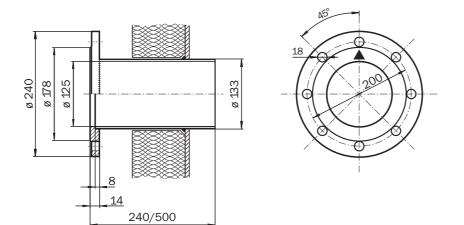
Purge air fixtures for SR-unit and reflector dimensions
